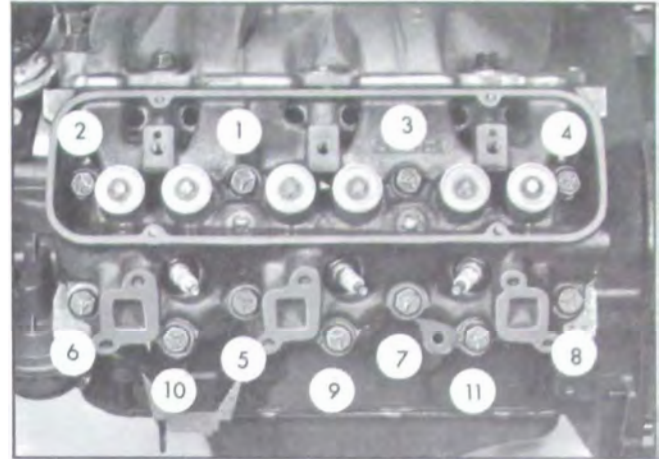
V-6 Cylinder Head Bolt Tightening Sequence (Left Shown)
